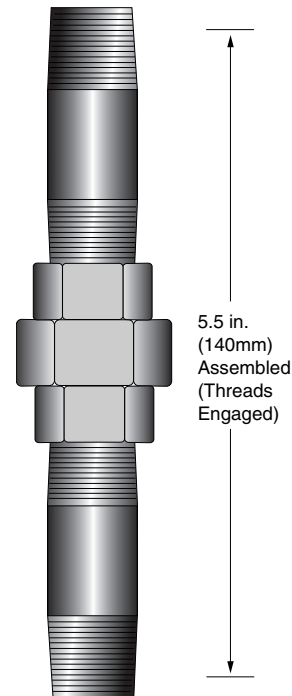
FLS Fluid Seal Fitting is used for transmitter assemblies with thermowells and assemblies with fixed immersion sensors. It prevents fluid leak along the sensor sheath so it's ideal for using heat transfer fluid in the thermowell and for air duct applications. Although the FLS provides adjustment precision, it crimps the sensor sheath, and can therefore be adjusted only once (up to 0.5 inch).
